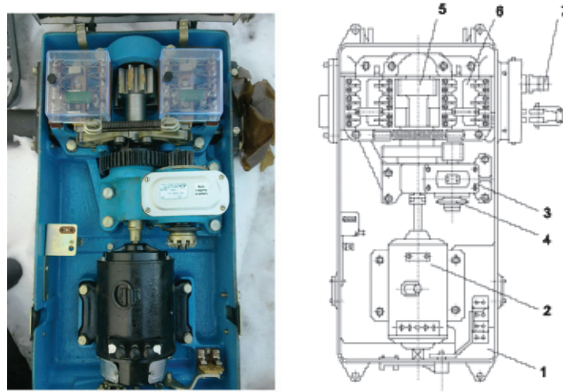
General view and drawing of switchgear type ЦП-6; 1) body of switchgear; 2) electric motor; 3) reduction gear; 4) clutch; 5) main shaft; 6) automatic switch; 7) control lines
